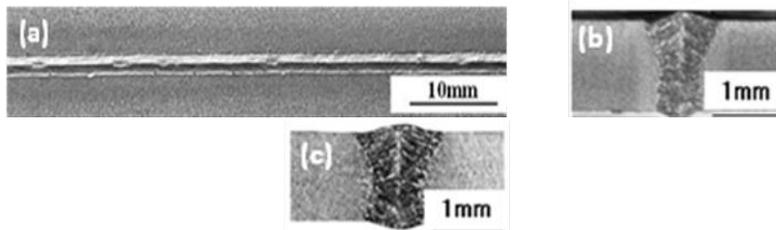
Morphologies of weld bead and bead cross-section under welding speed of 4.0m/min., shielding gases Ar and He (a) weld bead surface, (b) bead cross-section under Ar, (c) bead cross-section under He
